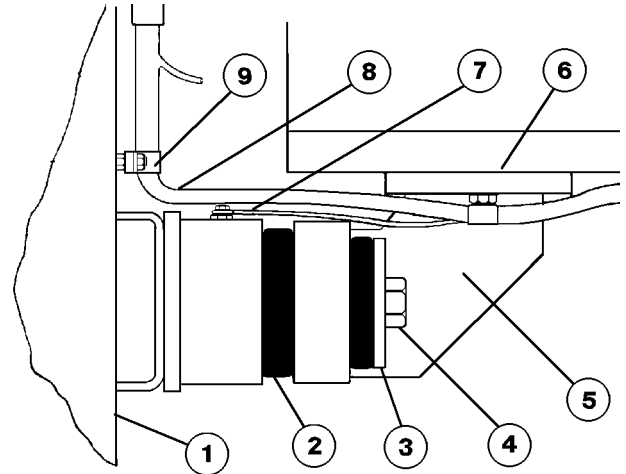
FUEL TANK MOUNTING BRACKET (Lower)
